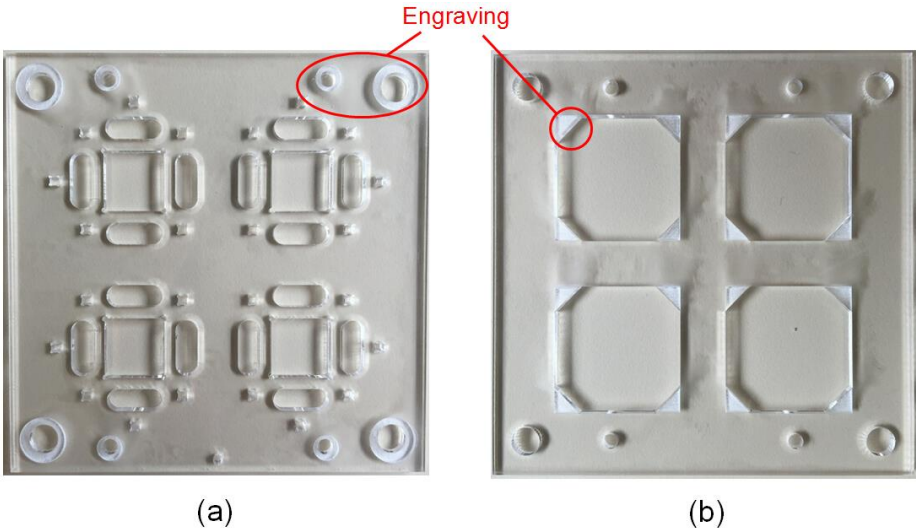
Prototype of two mechanical supports (a) Upper mechanical support (b) Bottom mechanical support
